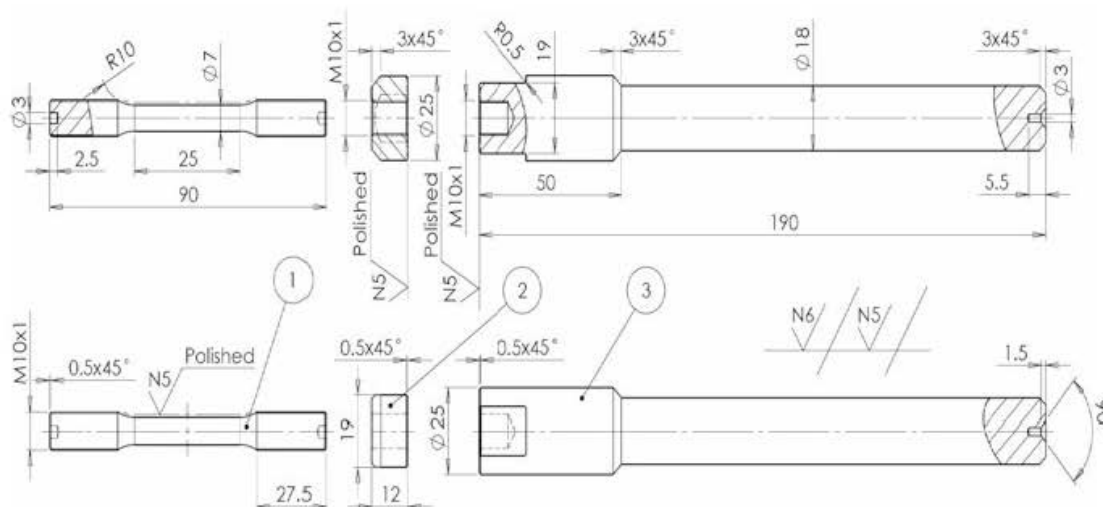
Specimen and specimen holder for testing LCF of steel NN-70 [8]. Item 1, LCF specimen, NN-70, D = 7 mm; item 2, Jam nut, 42CrMo4; item 3, Grip holder, 42CrMo4.
